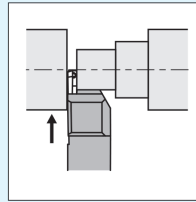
• Left-Hand holders are designed for Right-Hand machines
